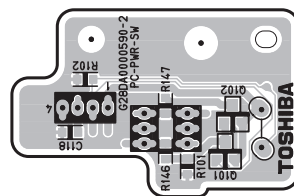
Power Switch PC Board (Bottom side)
